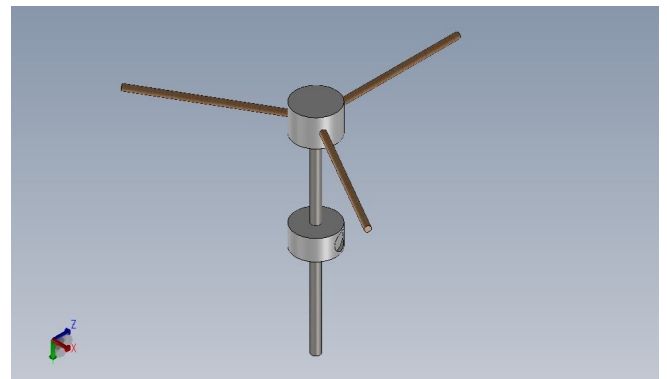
3D Solidworks model of the partial assembly of the anemometer.
